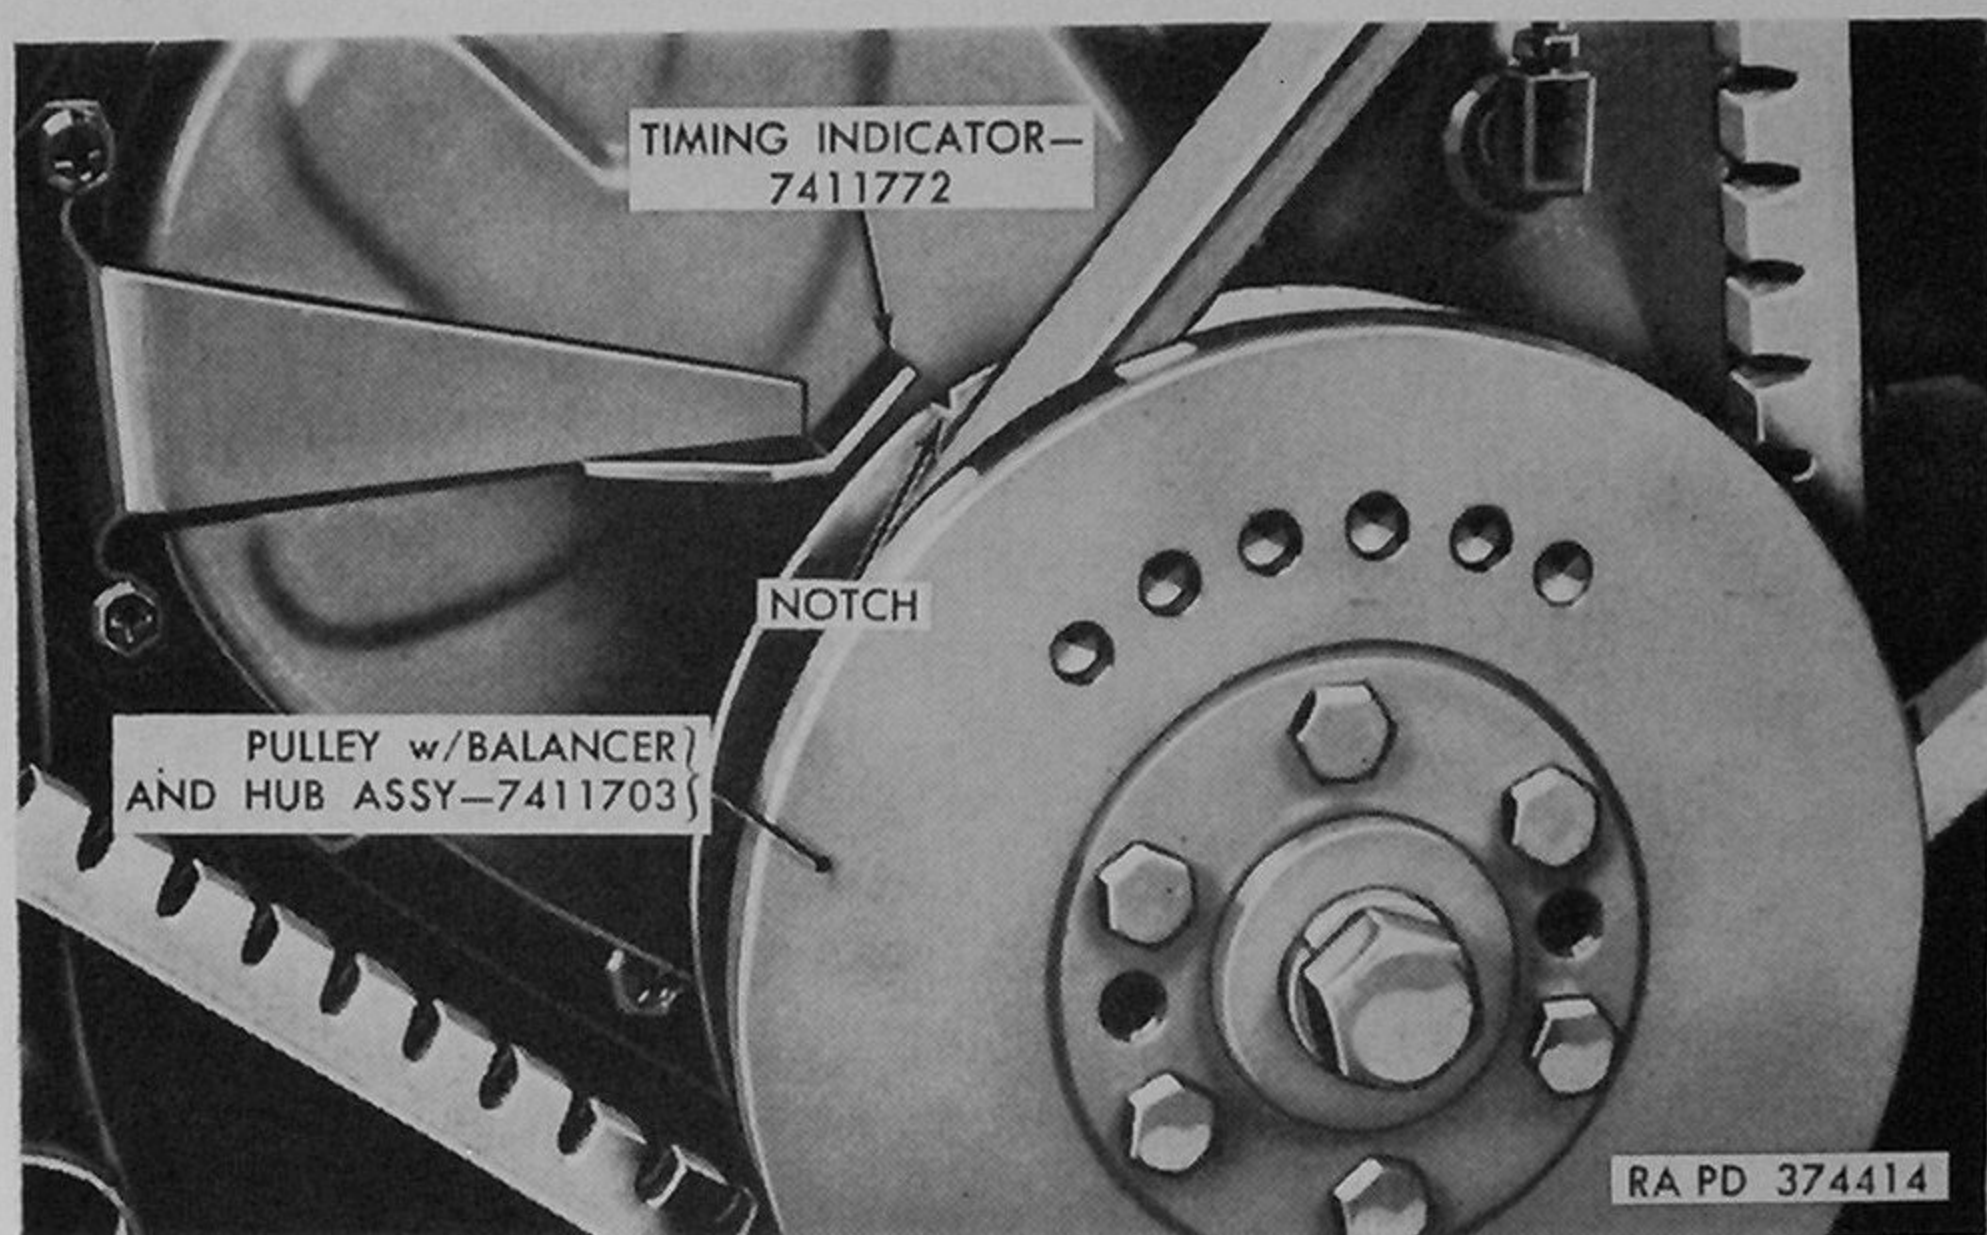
Location of timing notch on crankshaft pulley—engine assemblies 7411599 and 8726920.
